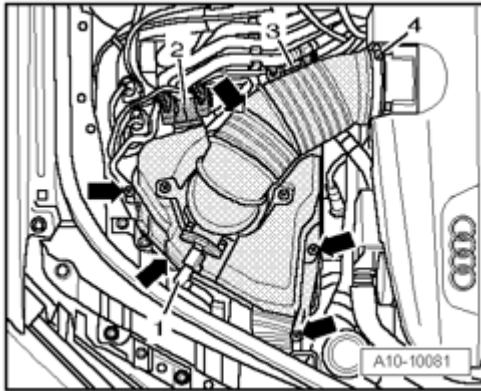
Mass Air Flow (MAF) Sensor G70 Electrical Connector, Upper Part Of Air Filter Housing Connections, Intake Manifold Air Duct Hose & Bolts
